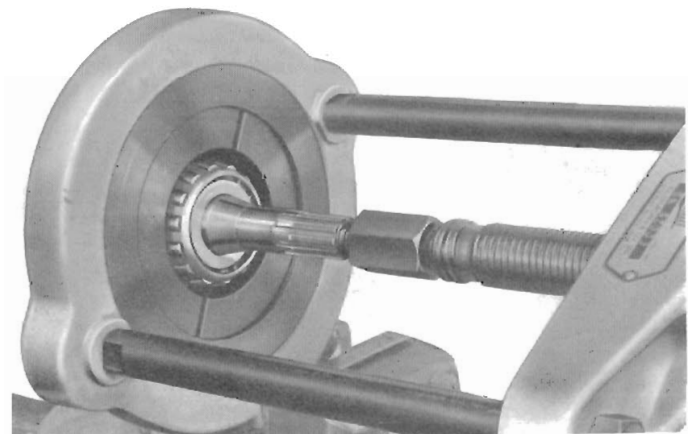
Using Churchill press and adaptors S4221A-4 to remove pinion head bearing
